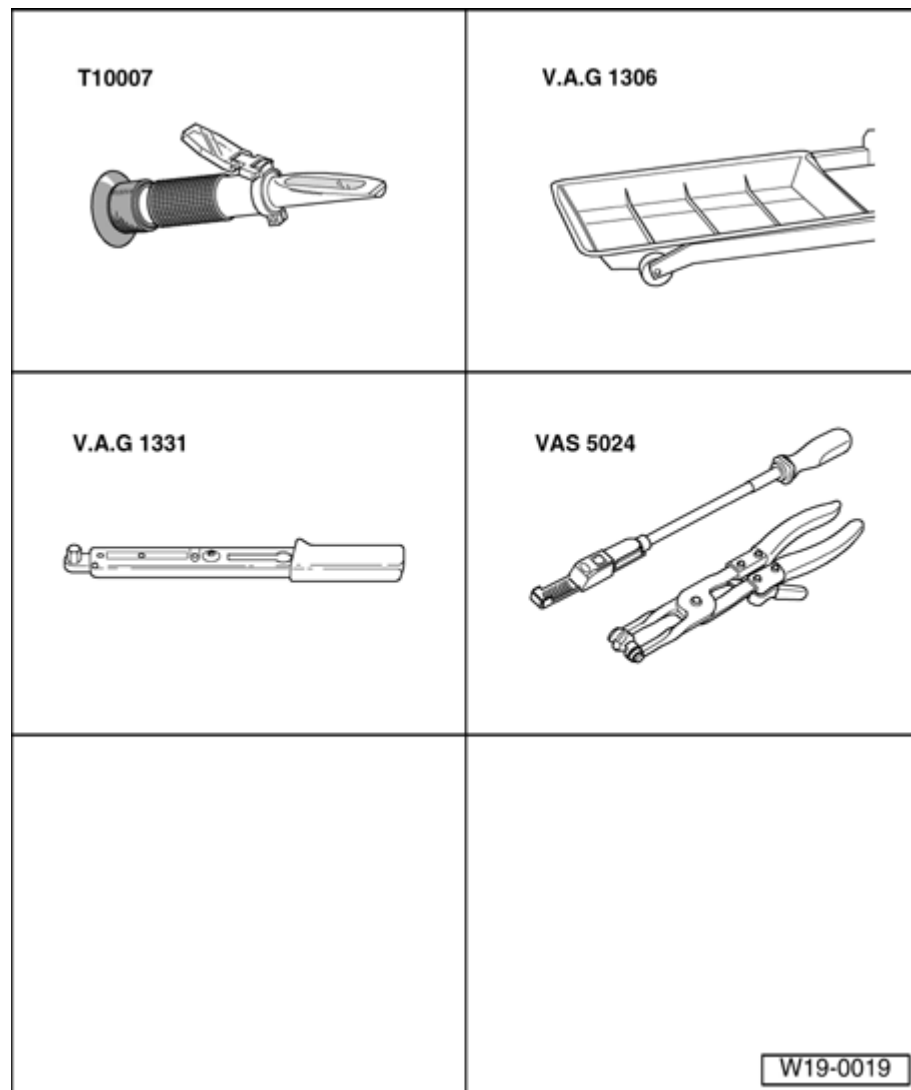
Identifying Special Tools - Cooling System Components, Servicing, Removing And Installing
